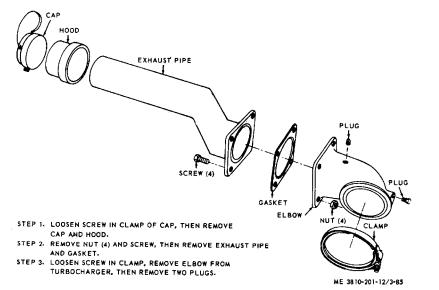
Exhaust pipe, hood, cap and elbow, removal and installation (engine model D333TA).
